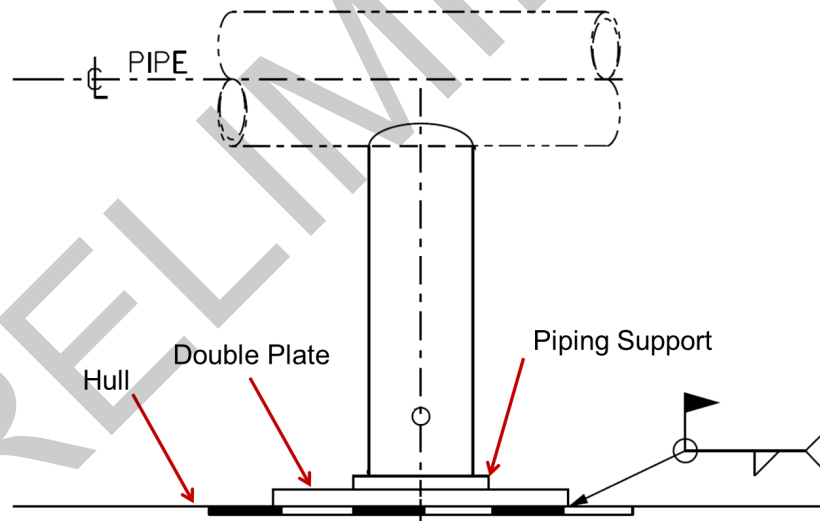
Double plate shall be big enough to contain all the piping support elements (anchors, guides, shoes, and so on)
